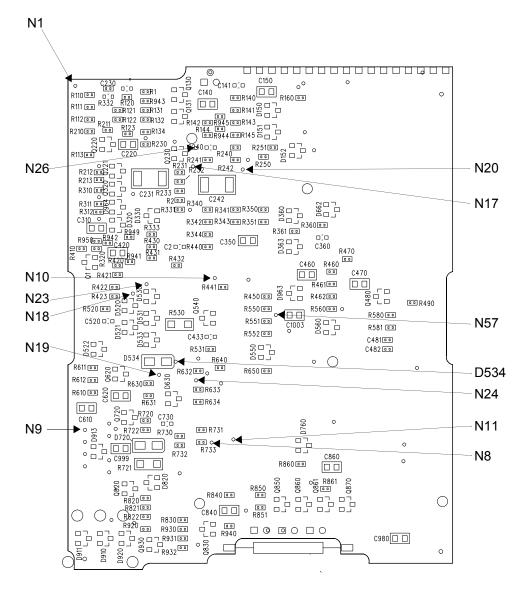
Main board components, back view, for P/N 670-0303-11 (and later versions)
